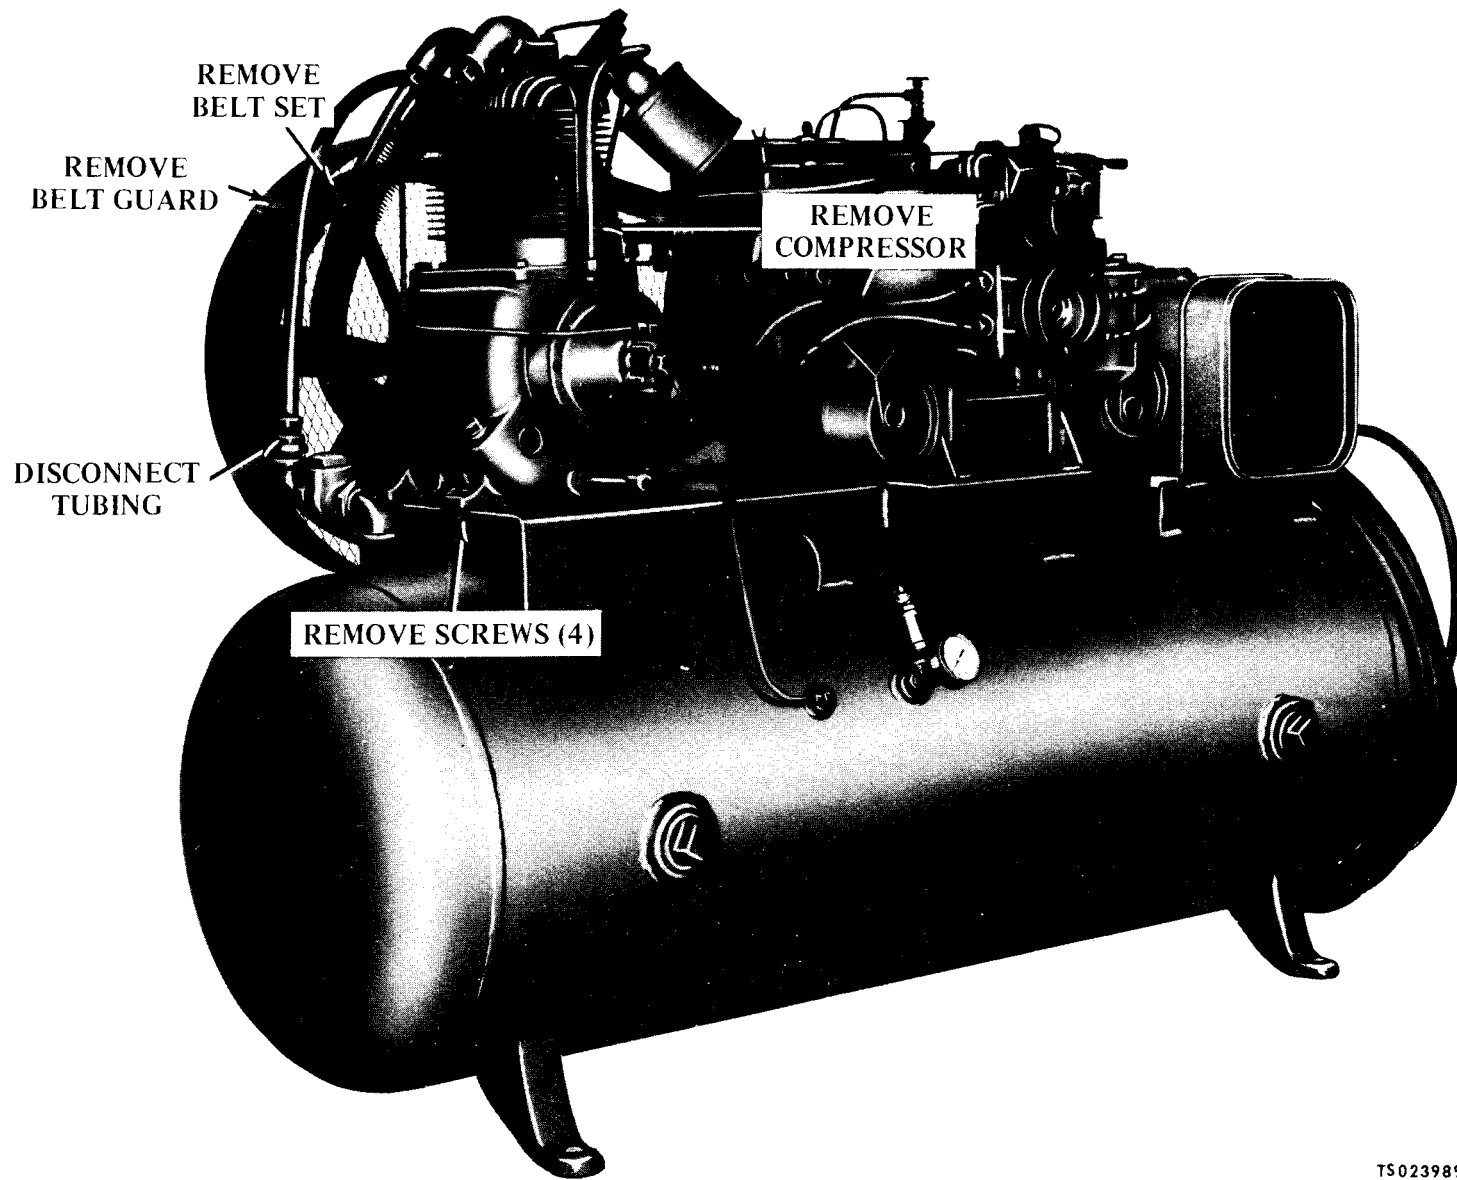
Compressor, removal and installation, models HGR5-8M-6.
